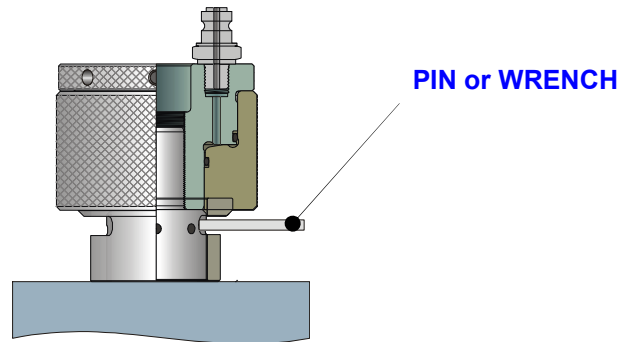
Cross section of hydraulic jack (유압 잭의 단면도)
